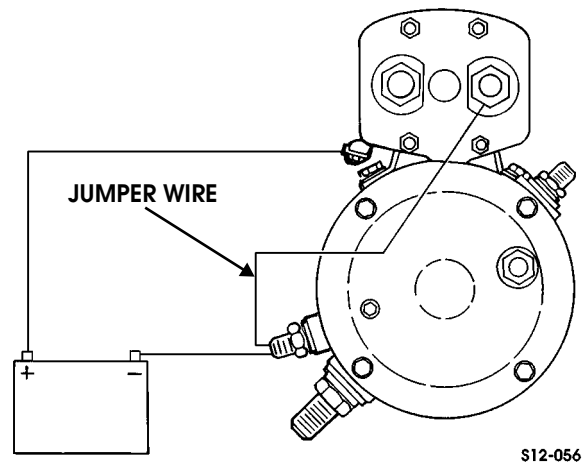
Battery and Jumper Connections for Pinion Clearance Check
